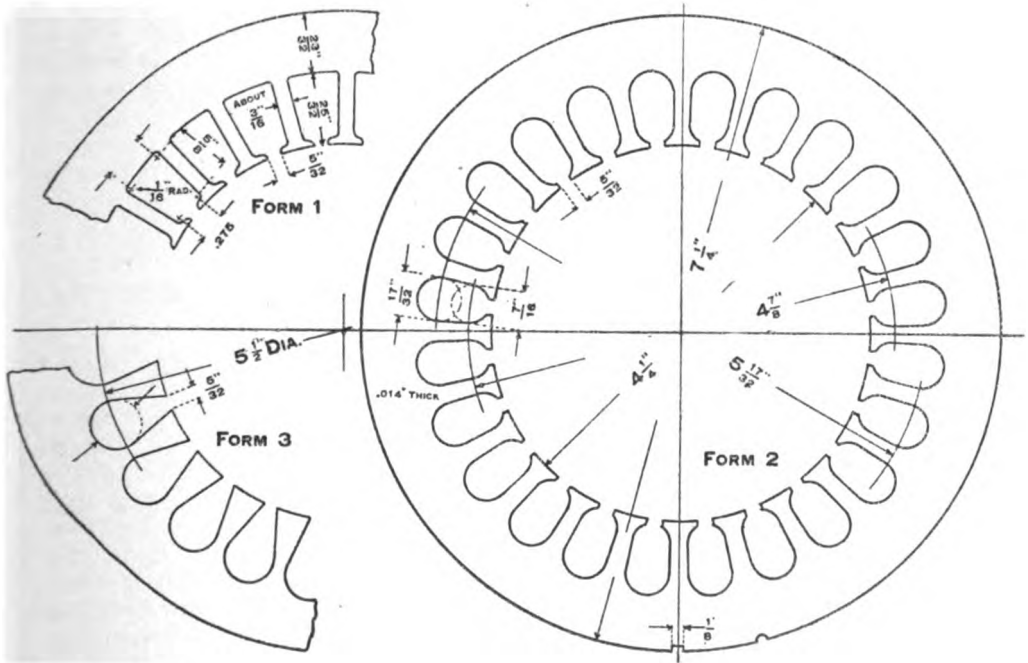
SHEET IRON FOR STATOR OF MOTOR SHOWING SEVERAL PRACTICAL FORMS OF SLOTS
